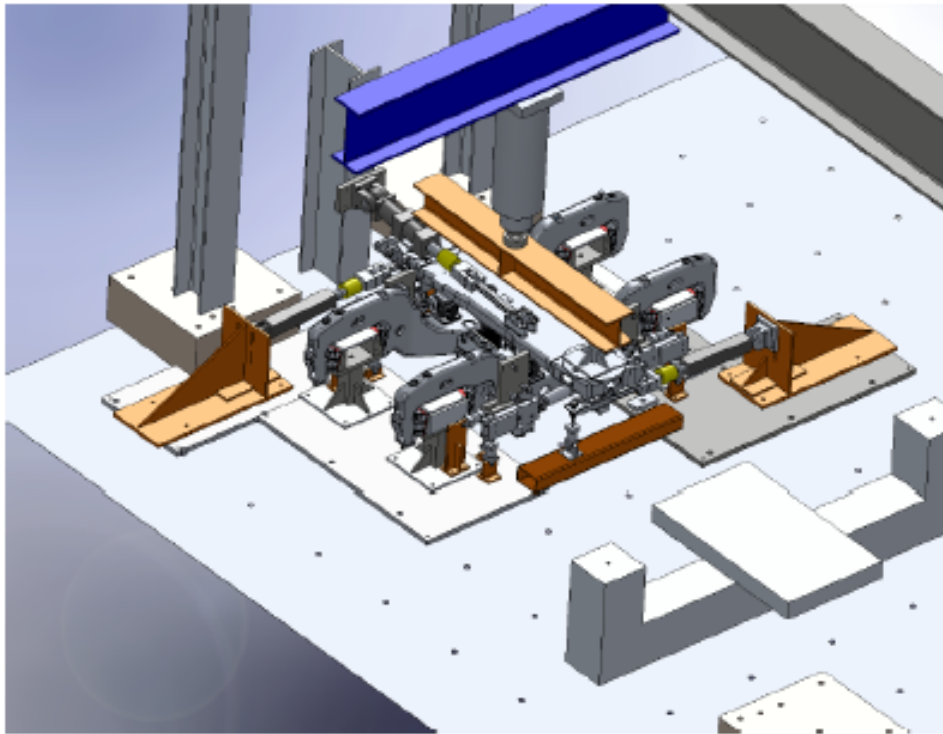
Test Jigs and Fixtures Virtual Prototype
